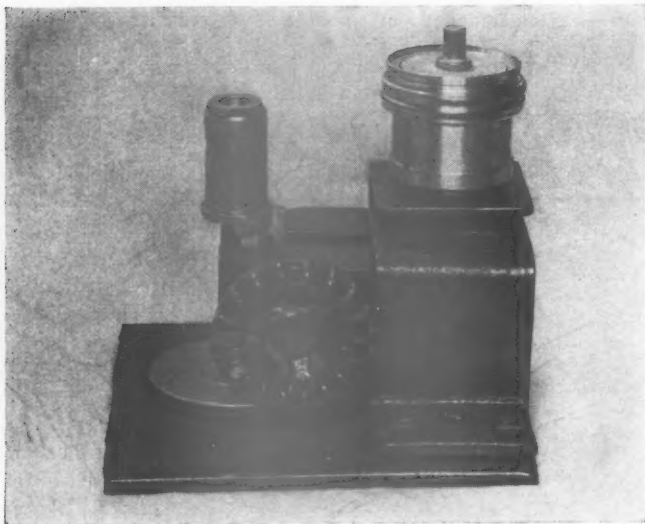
Device for holding service and emergency pistons while removing or applying the piston-spring nut
